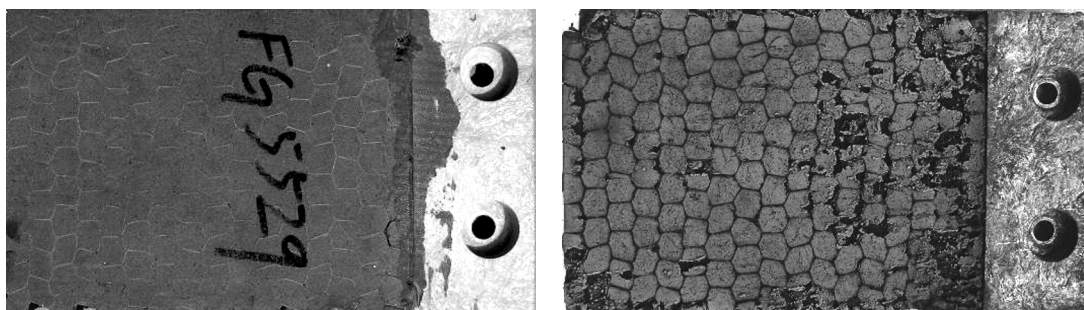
Tensile fracture surfaces of resin matrix
